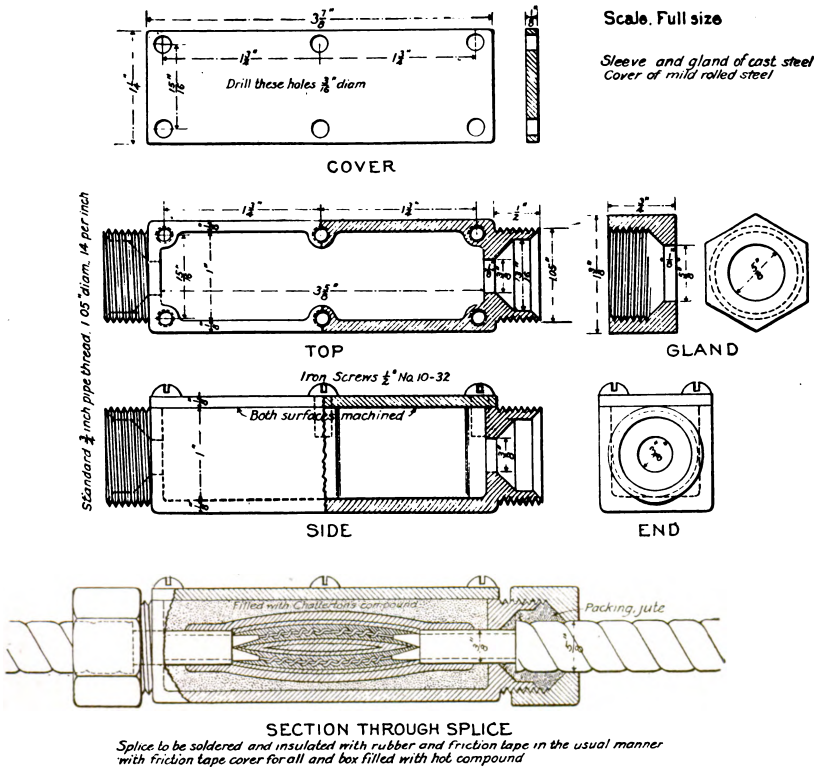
CABLE, TYPE 251, SPLICING SLEEVE.
